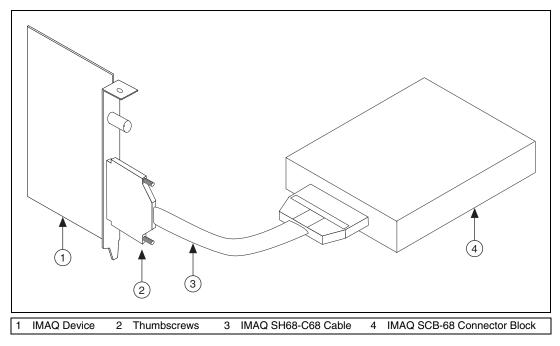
Connecting the SH68-C68 Cable to Your IMAQ Device and IMAQ SCB-68 Connector Block
